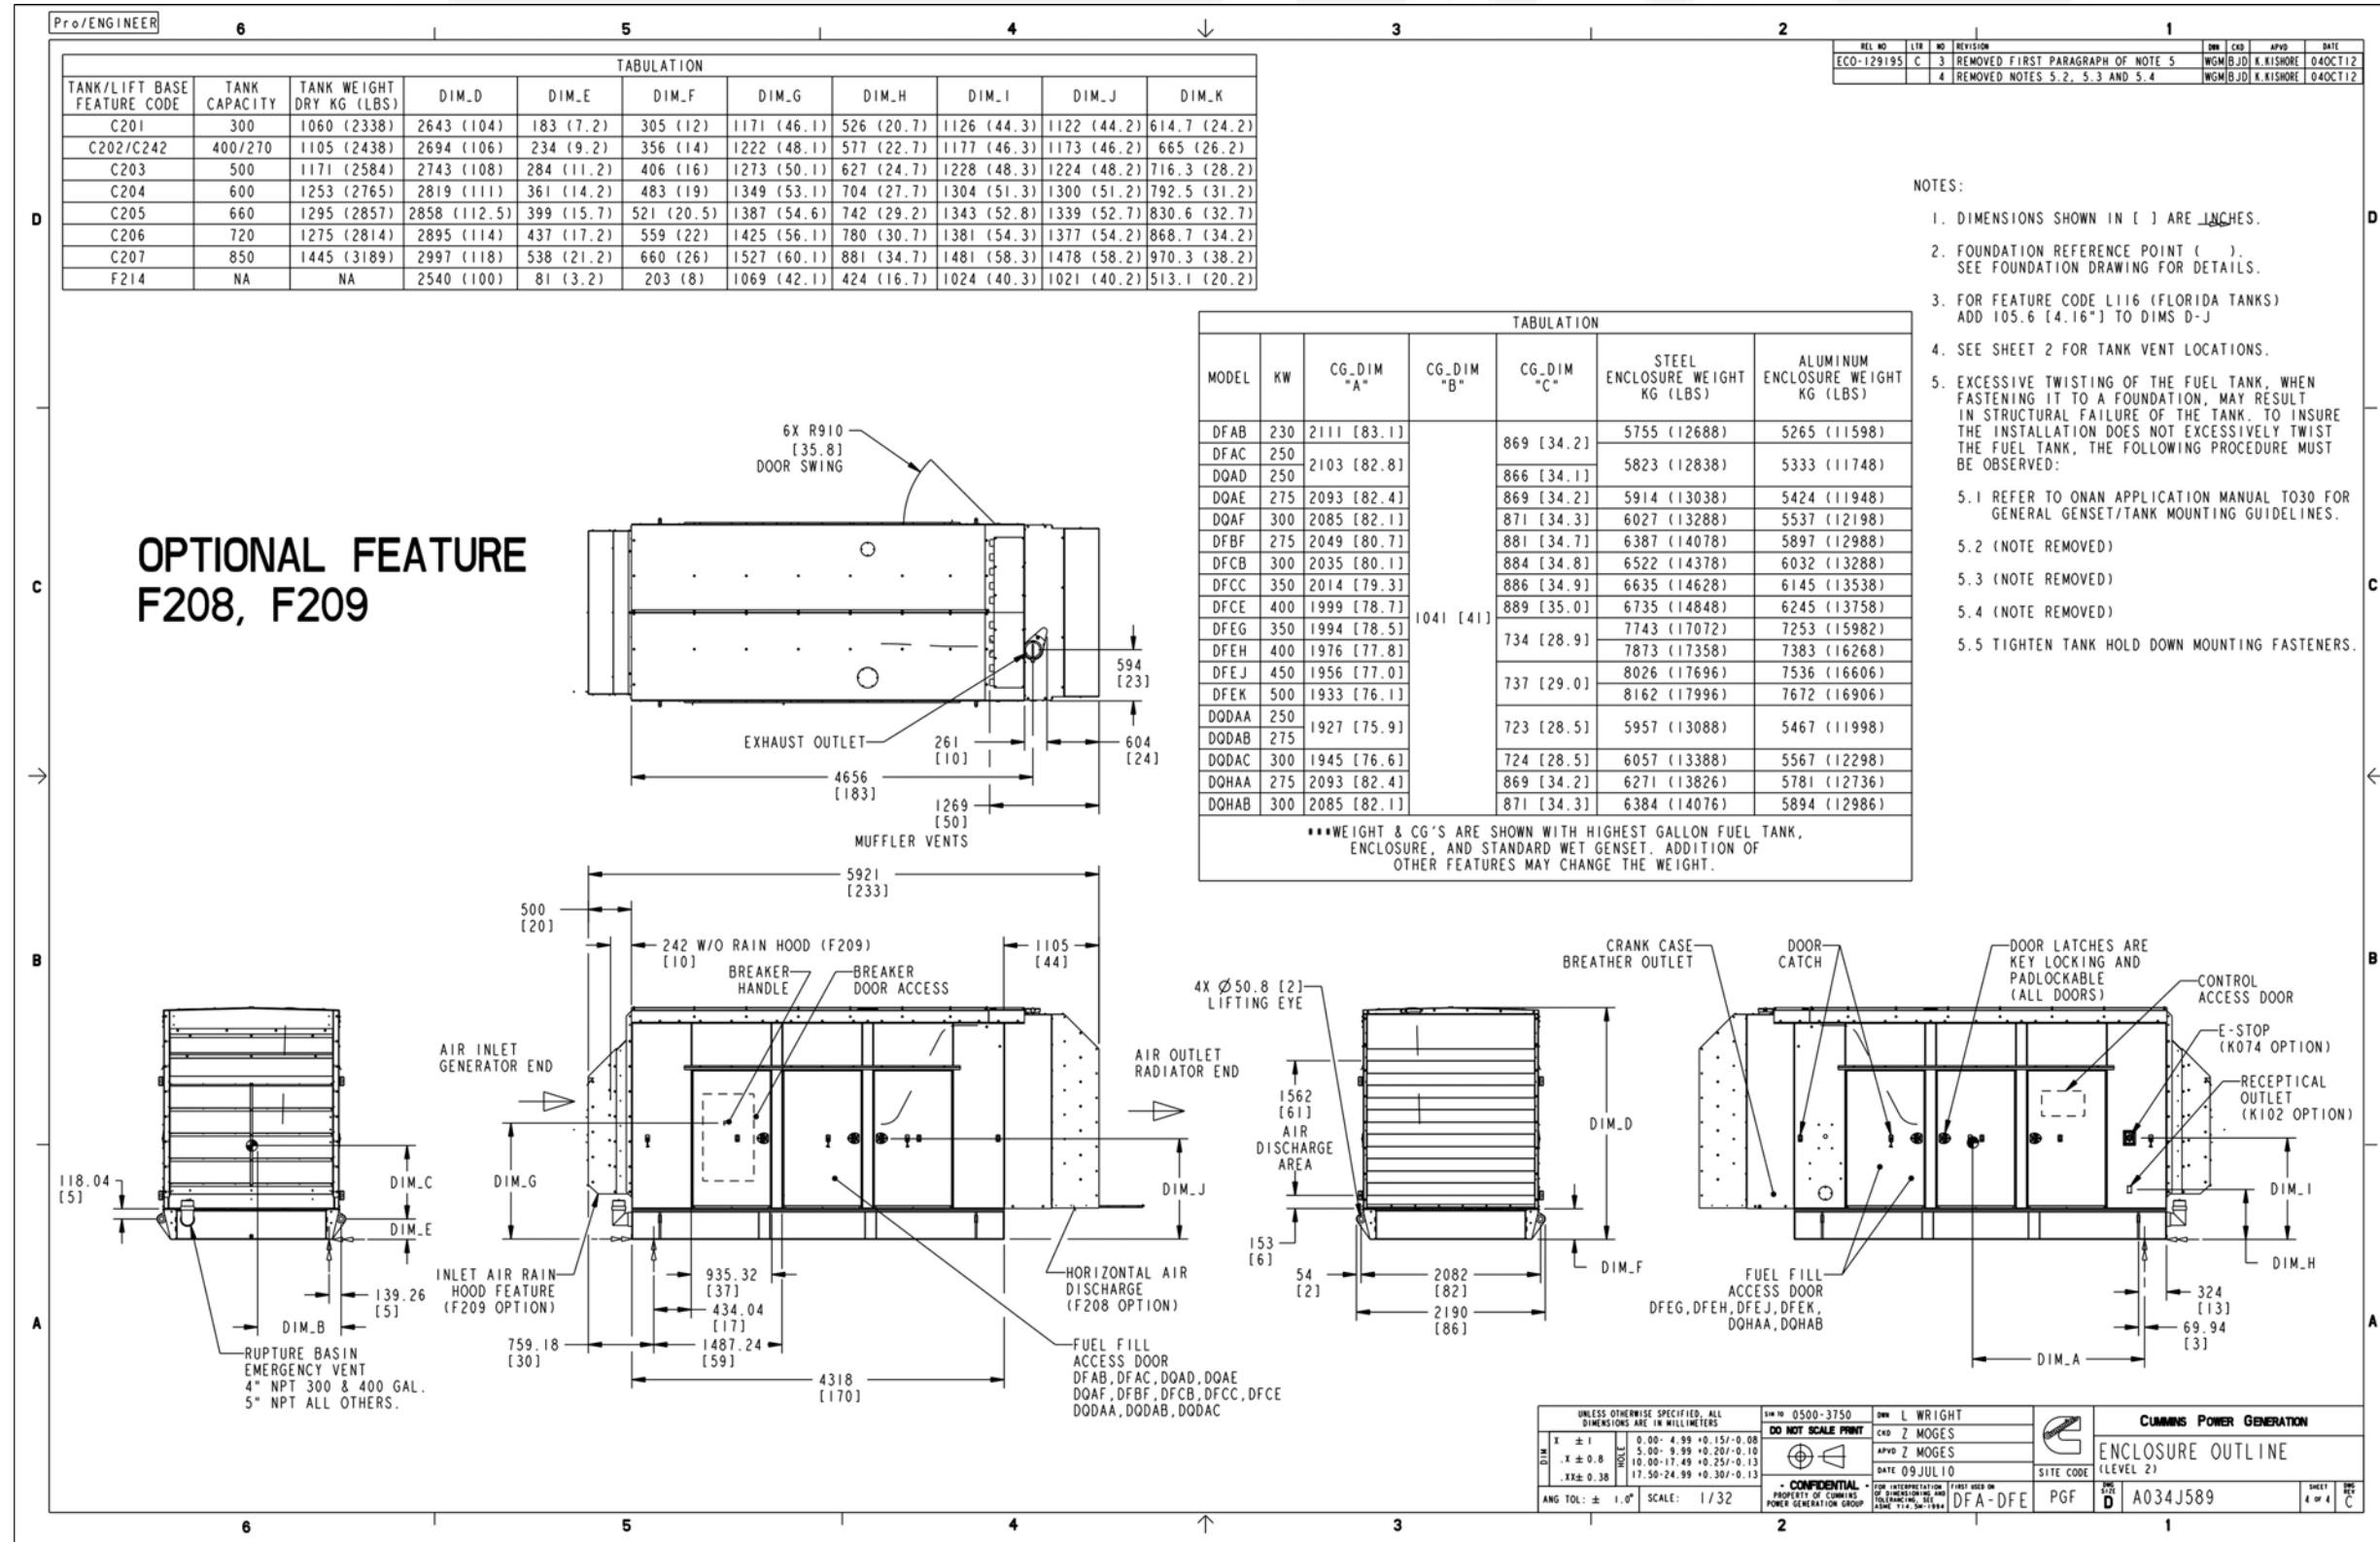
ENCLOSURE OUTLINE DRAWING (F202, F205, F206, F208, F209) (SHEET 4)
